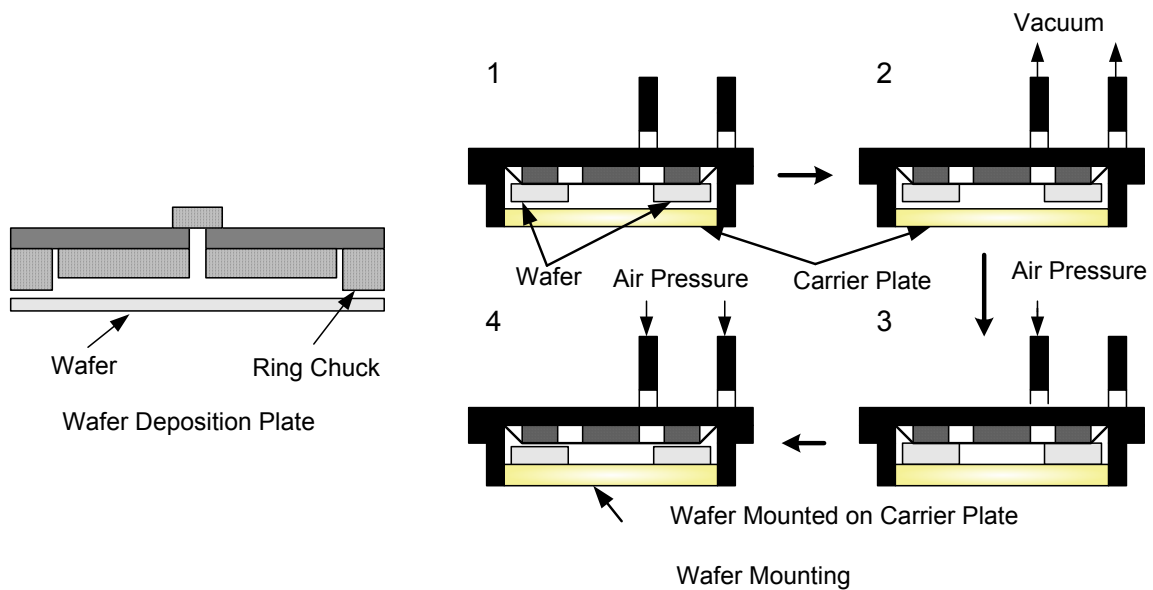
Wafer deposition plate having six ring chucks and wafer mounting process [WSAG 1997-2003]
